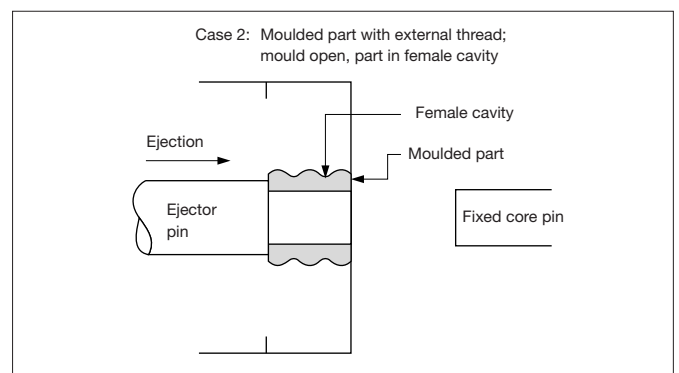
Mould-ejection of rounded thread-form undercuts – male
